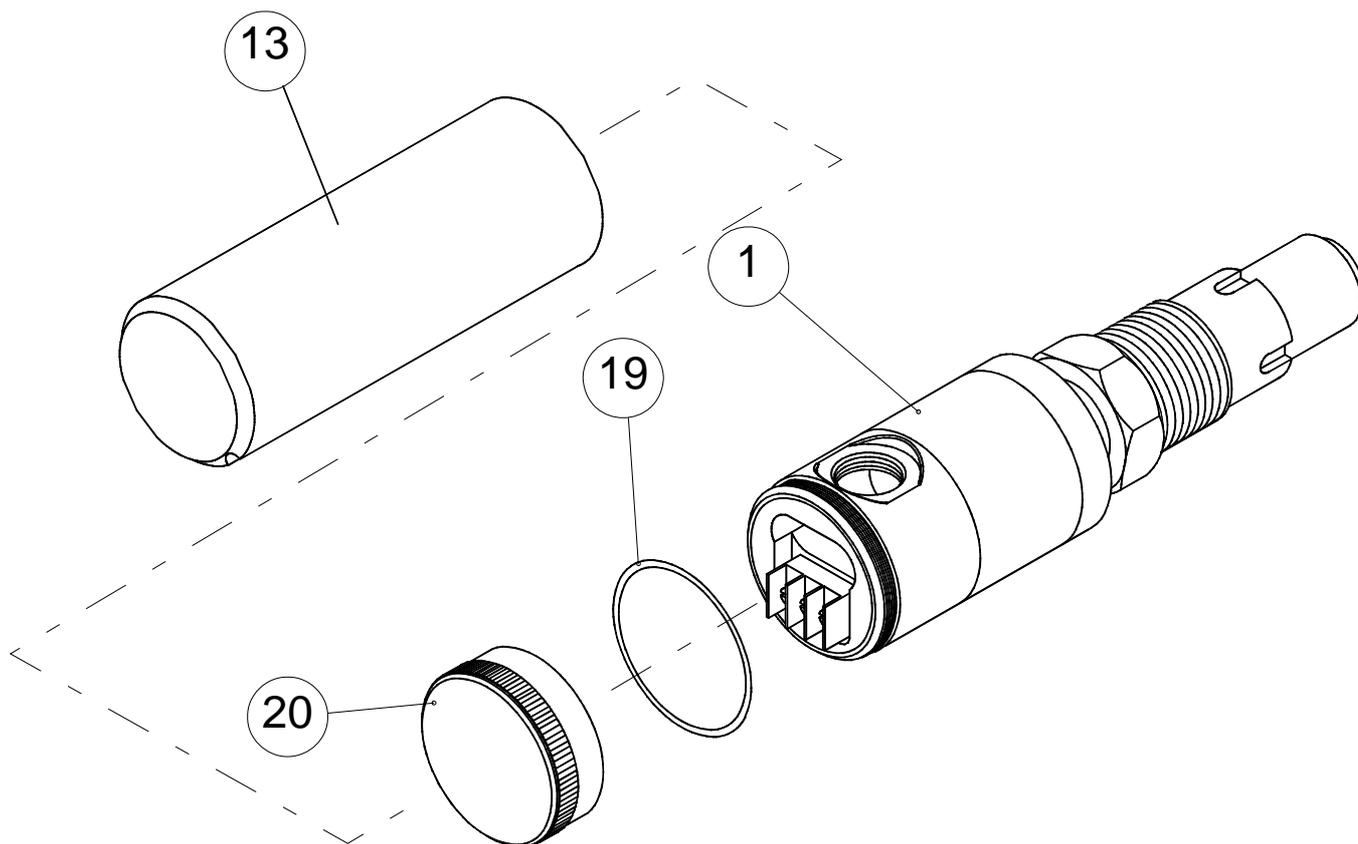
Parts list: Enclosure H and T, housing with PLUG connector
